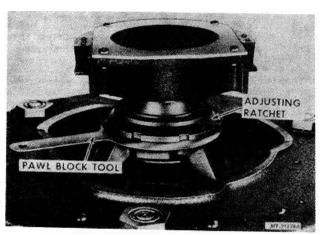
Pawl Block Tool in Position. (Clutch Removed from Vehicle for Illustration)
